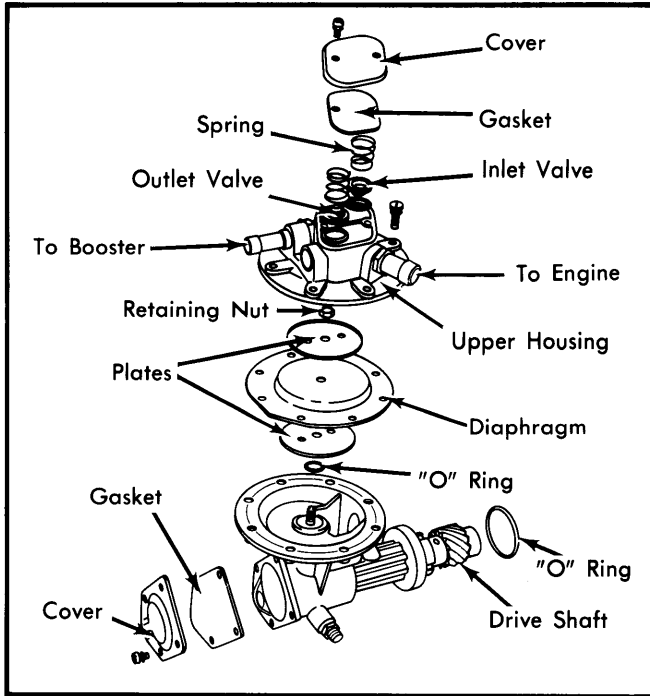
Exploded View of Diesel Engine Vacuum Pump Assembly
